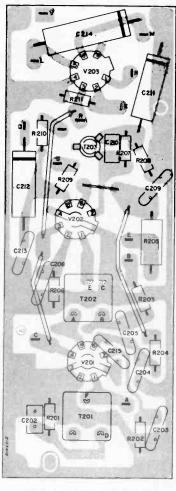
PW 200 Sound 1-F & Audio Assembly Layout
